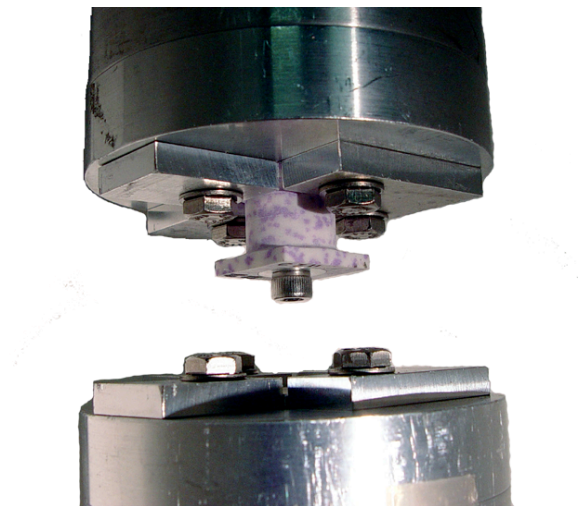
Axial-torsion fixture with LX-14 sample in place. After the upper brackets are tightened, the centering pin is removed and the upper rod, with the sample attached, is lowered into place. Then the lower brackets are tightened and testing can commence.
